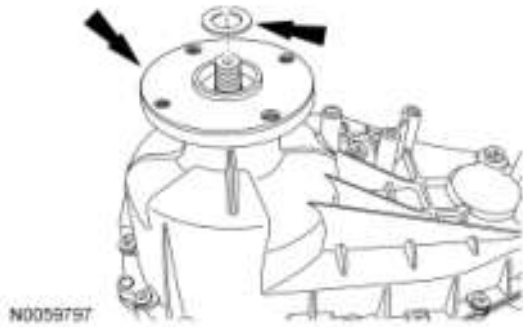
Removing Output Flange & Output Shaft Yoke Washer
